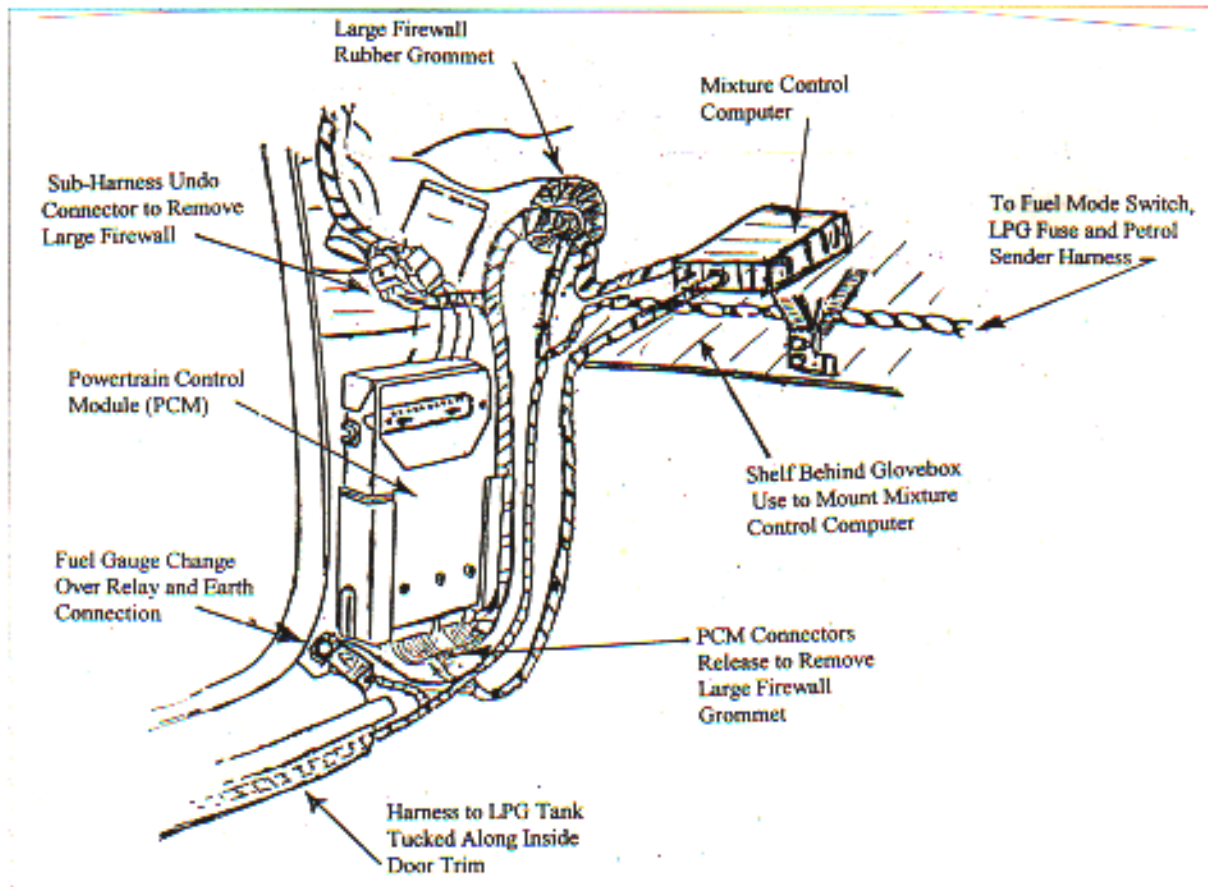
Loom Layout in Area Around LHS Door Pillar.
